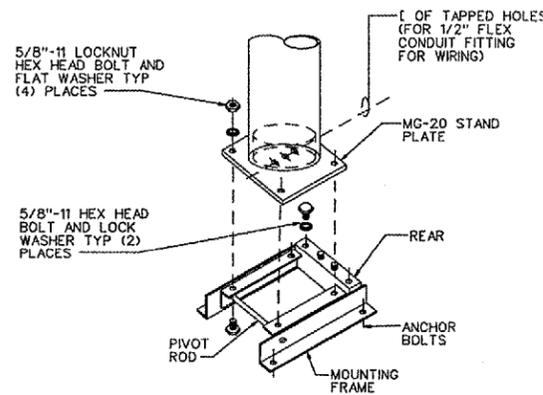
MOUNTING STAND ASSEMBLY MG-20
